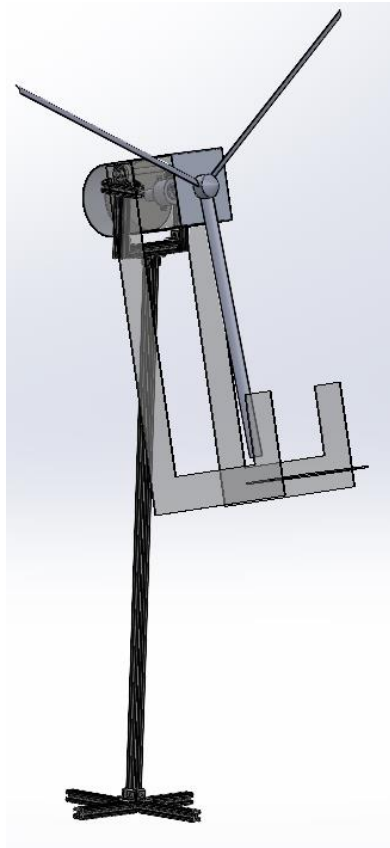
Full TAWT- 4 Turbine CAD Assembly
